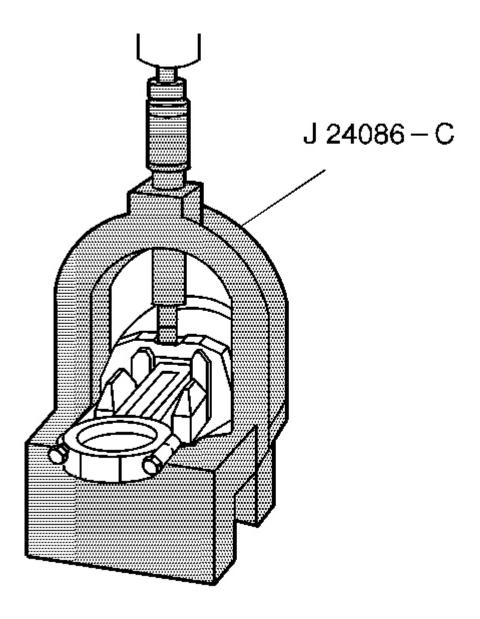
Pressing Piston Pin From Connecting Rod Using J 24086-C Courtesy of GENERAL MOTORS CORP.
